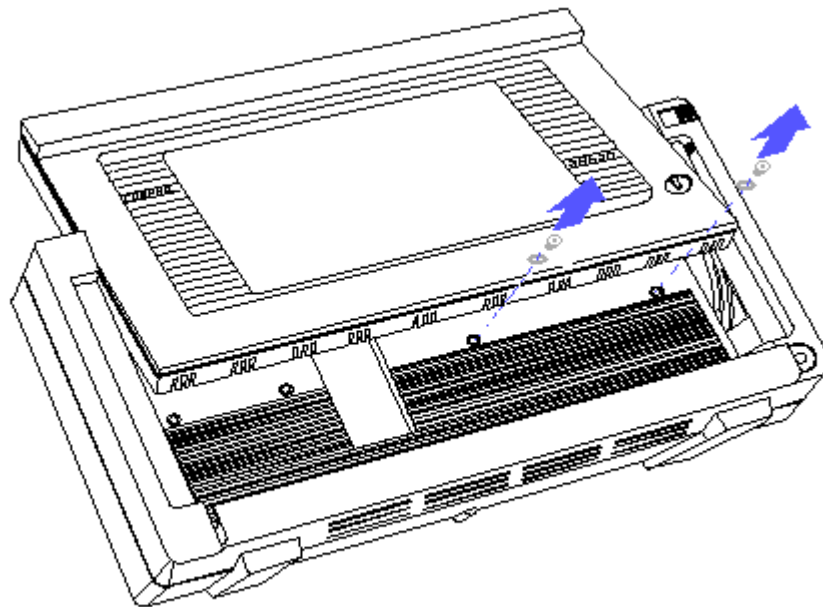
Removing the Bottom Two Screws and Washers from the Mass Storage Device Enclosure
